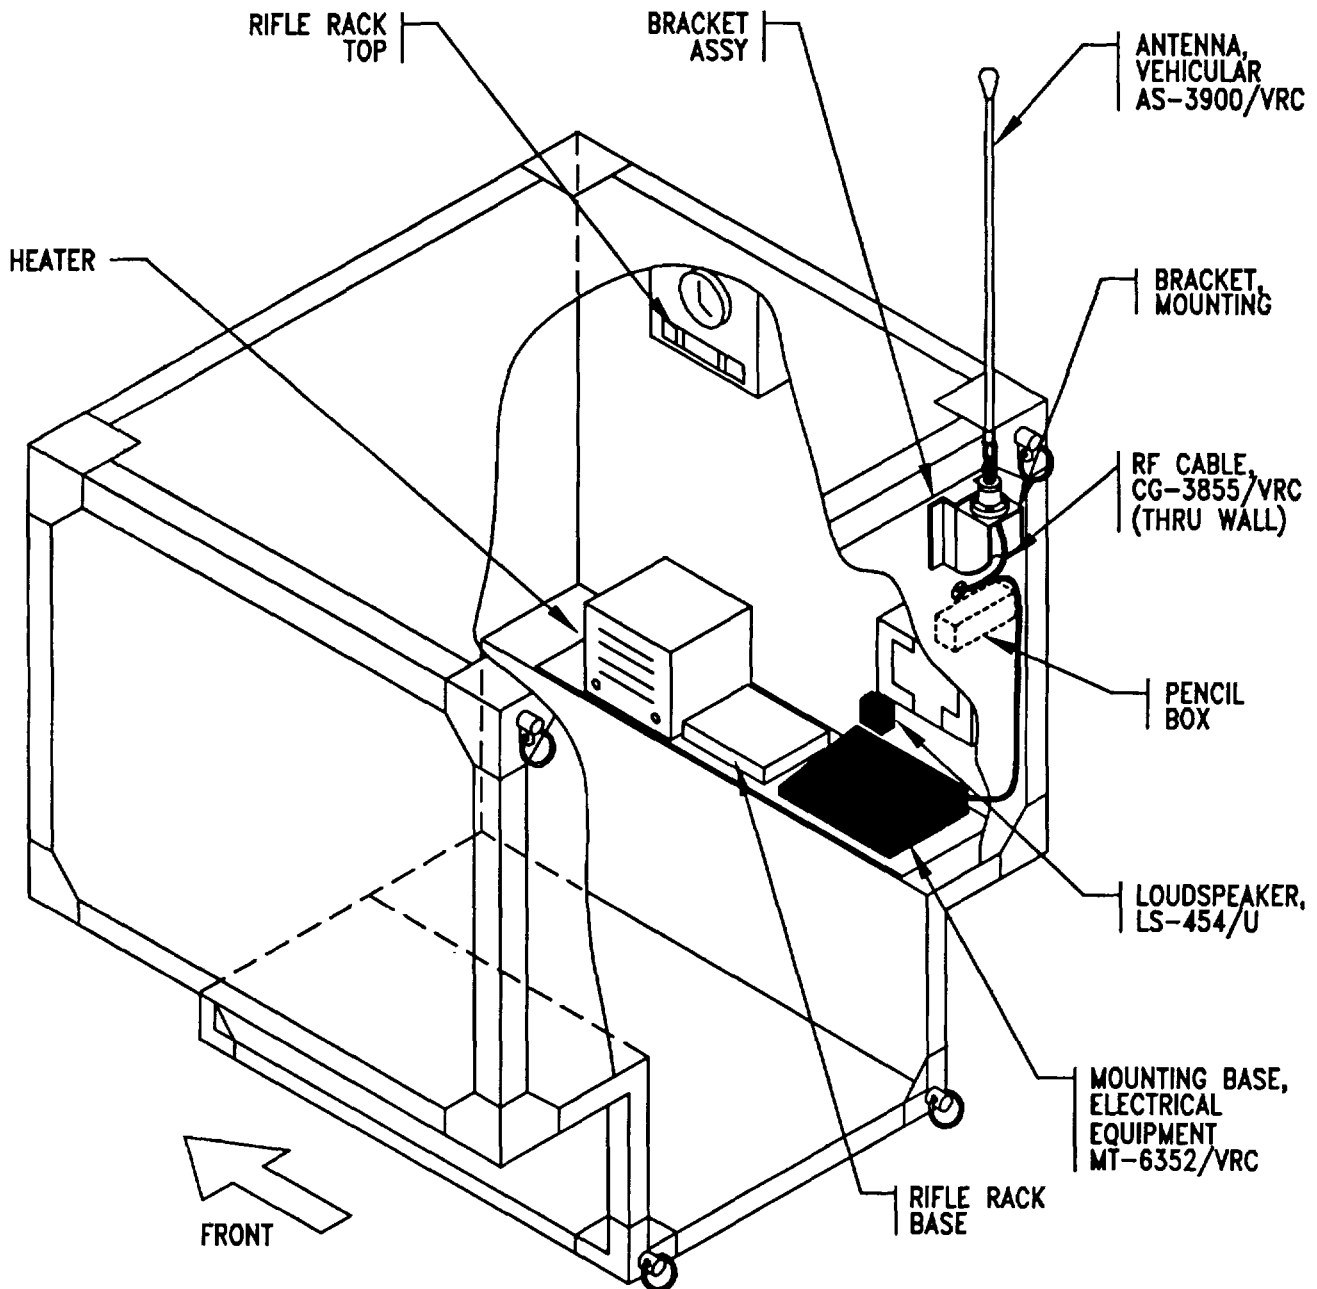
(1). MK and Radio Installation: MK Equipment Locations
